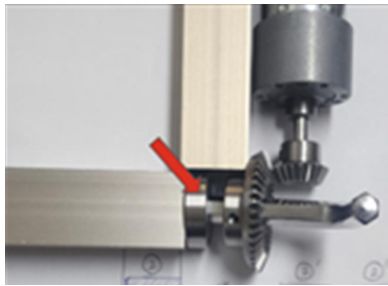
Concept Sketch of Bearing and Bevel Gear Holder.
